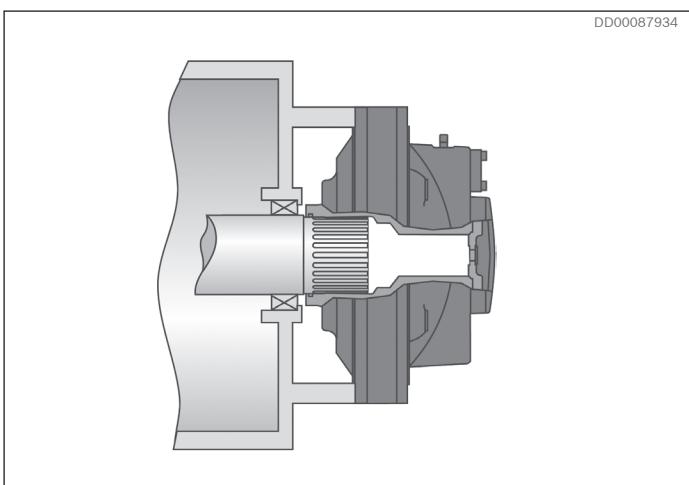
Example: Flange mounting of CA 50 with splines
